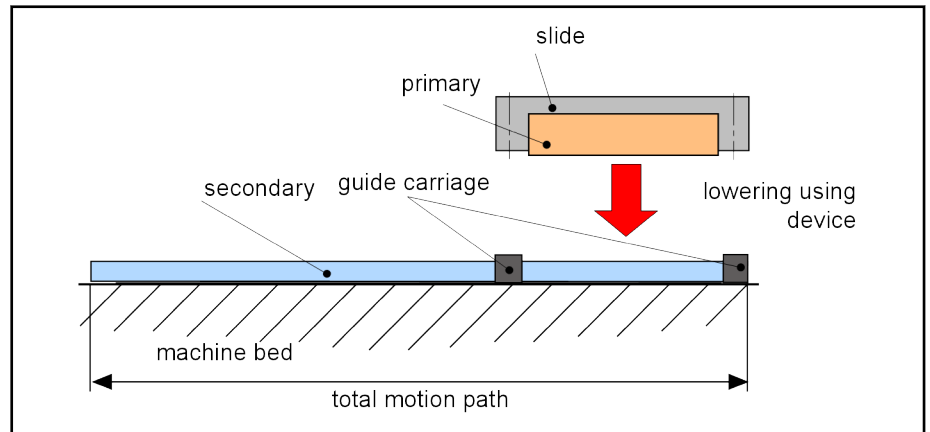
Installation of linear motor components at a path consisting of one single secondary part.
